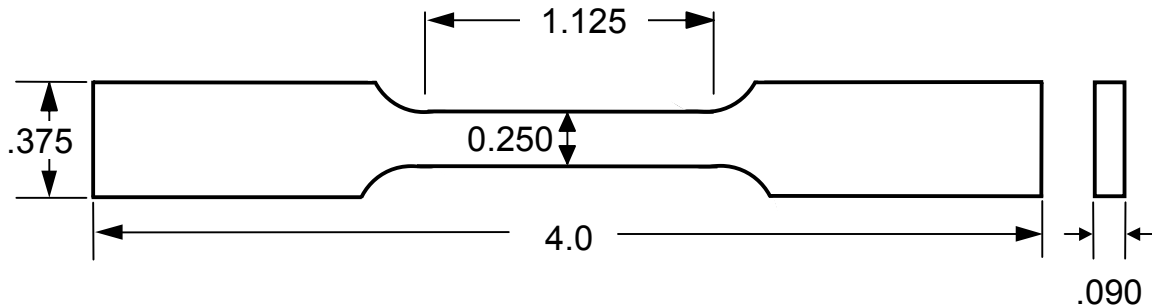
Dog bone tensile specimen geometry (dimensions in inches).
